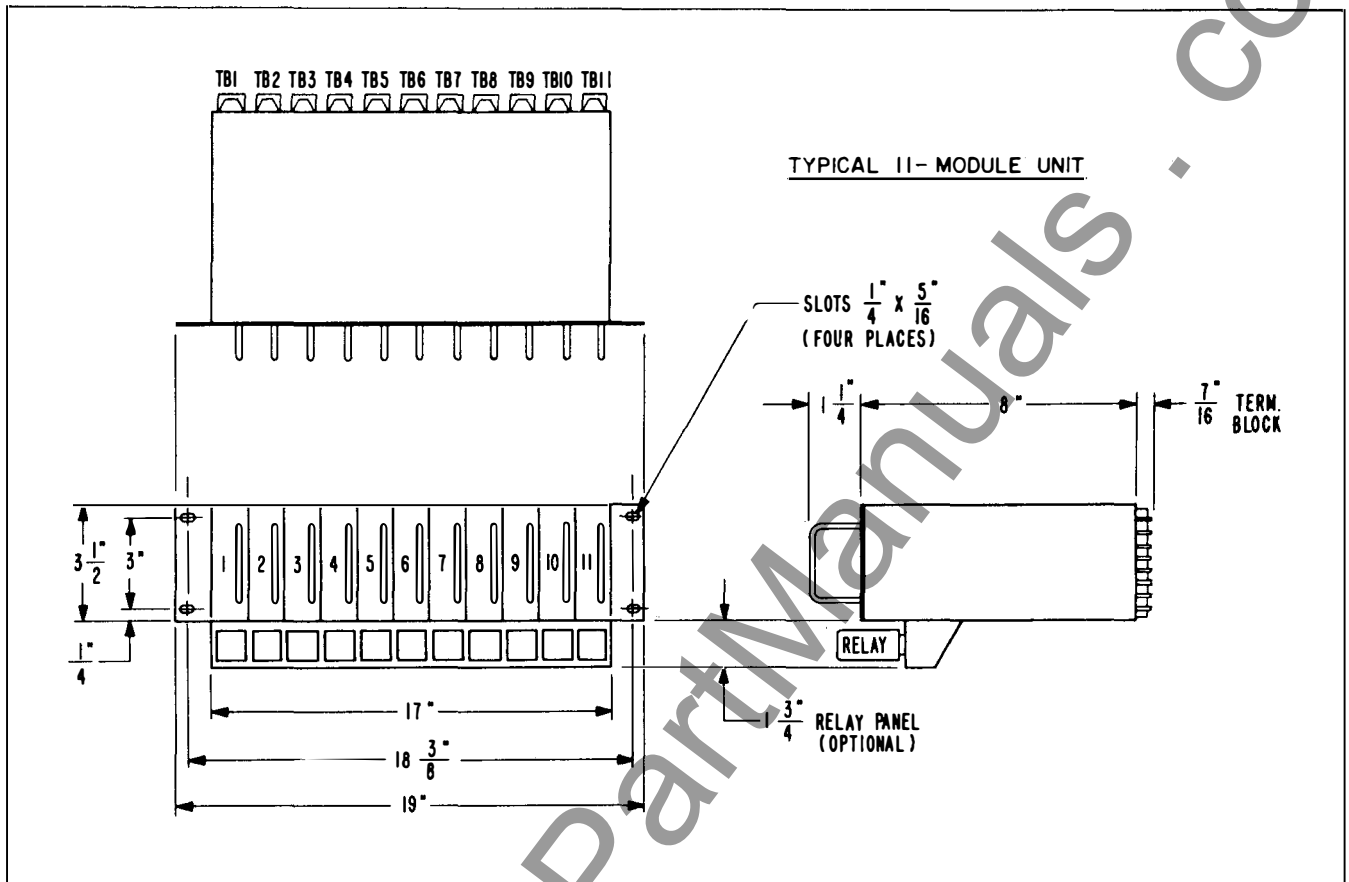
Outline and Drilling Plan of 11 Module Chassis
